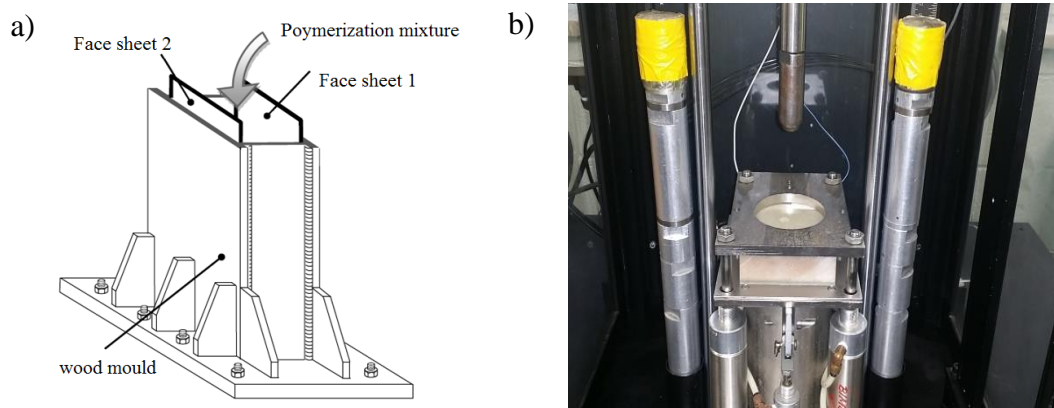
a) Wood mould for fabrication, b) Specimen fixture apparatus
